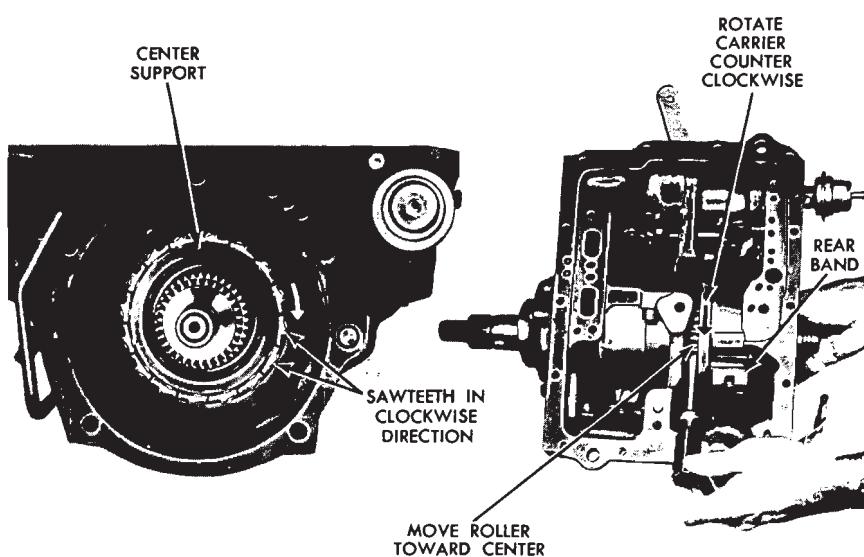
Planetary Clutch Installation in Carrier—Center Support Not Chamfered
